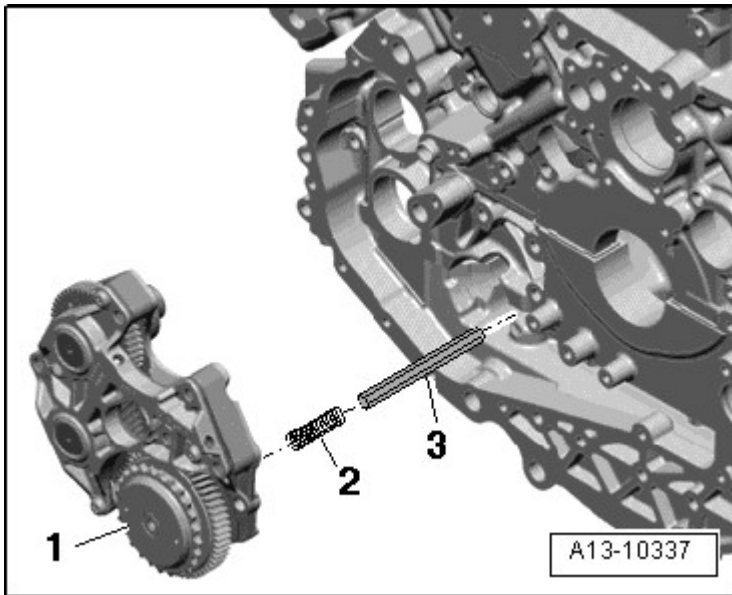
Identifying Compress Spring -2- For Input Shaft -3- In Spur Gear Unit -1-
